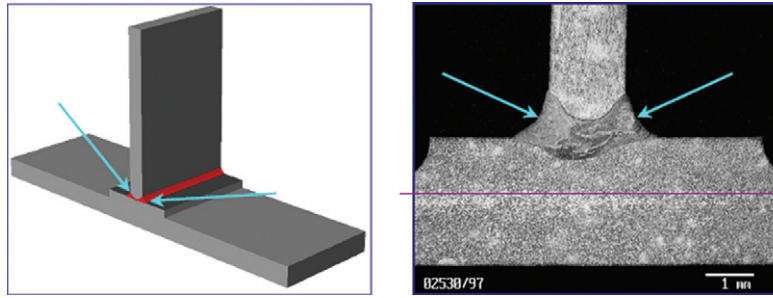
Laser beam welding concept (left) and X-Ray photo of typical welded stiffener (right). *Source: courtesy Piaggio Aerospace.
